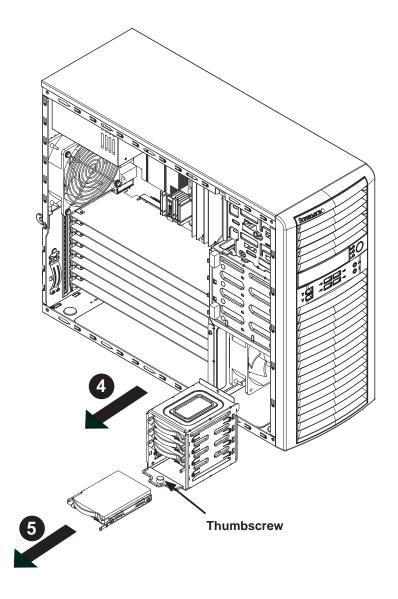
Installing a Hard Drive Carrier into the Hard Drive Cage
